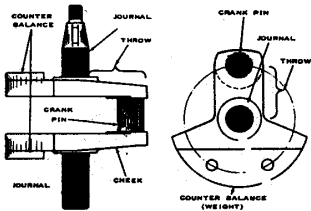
Single throw crankshaft in single cylinder engine has two main bearing journals and one connecting rod journal.
